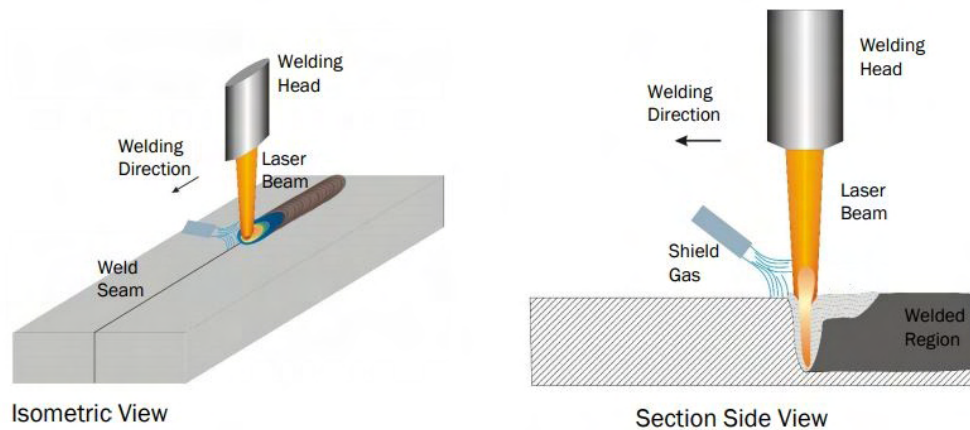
Laser Beam Welding set up (www.blog.alfamm.ro)
